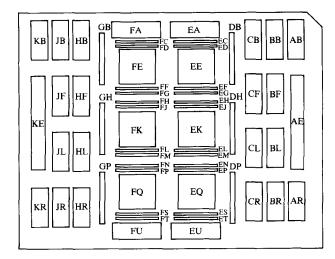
Nomenclature drawing showing component areas of board. The six-TCM board houses modules, terminating resistors, signal I/Os, and decoupling capacitors. Areas for soldering the power buses to the board are also indicated.
